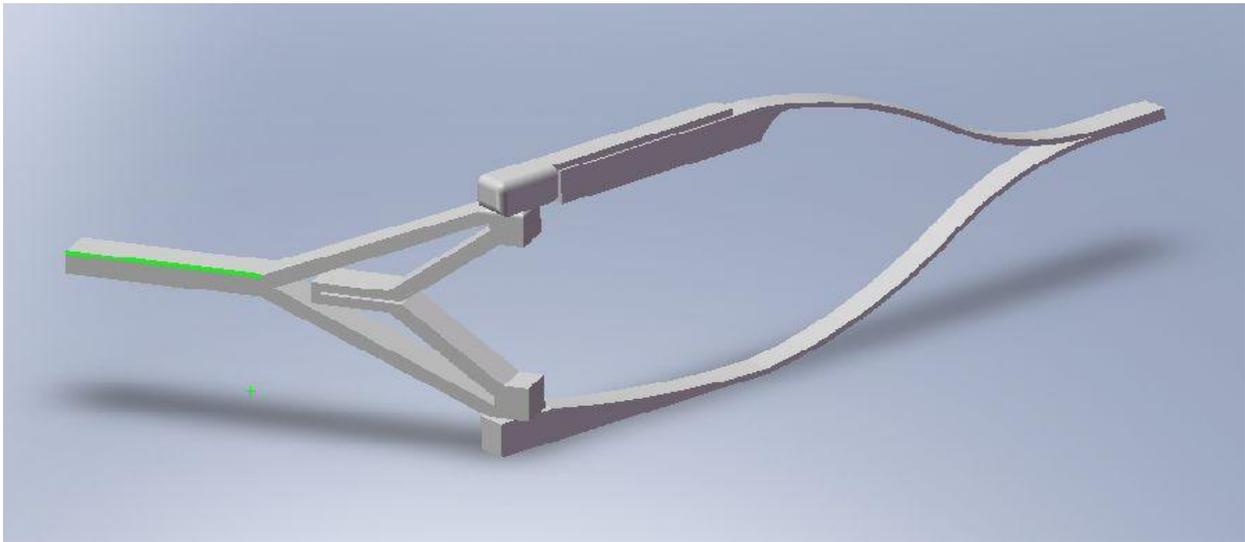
This image depicts the full assembly of the initial forceps, sliding mechanism, and clamp design.
